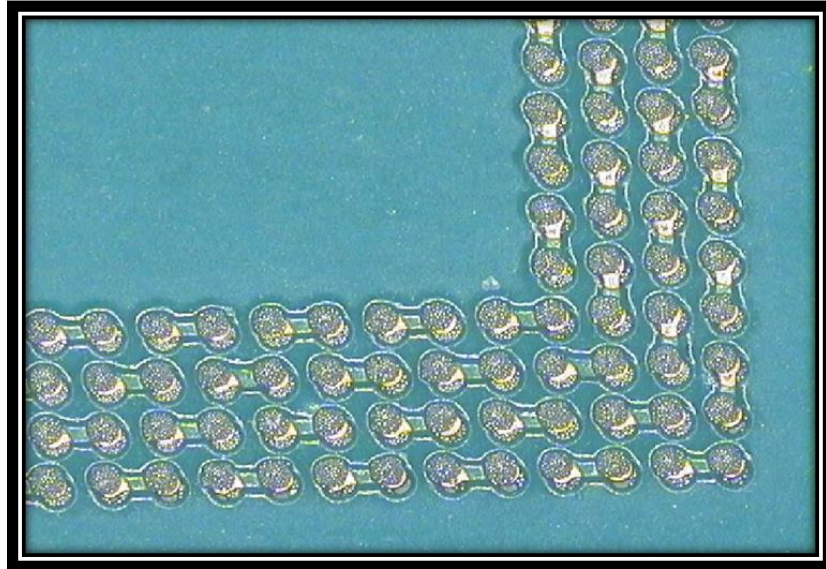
Misaligned Solder Paste Print prior to X-Y Realignment
